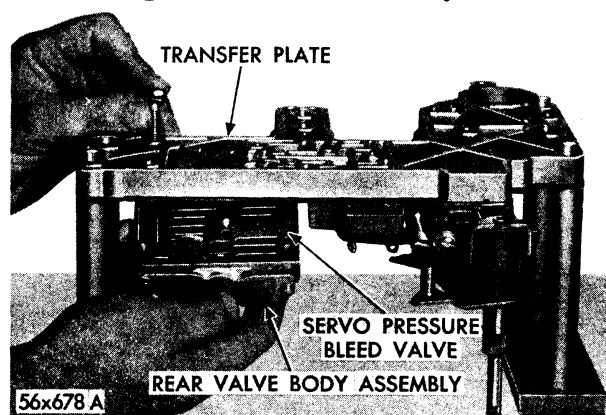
Removal and Installation of Rear Valve Body Assembly
